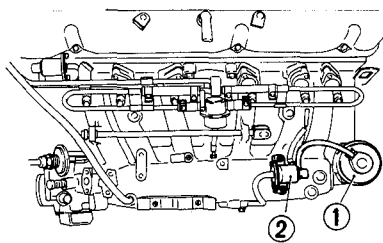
Removing E.G.R. control valve and vacuum switching valve
